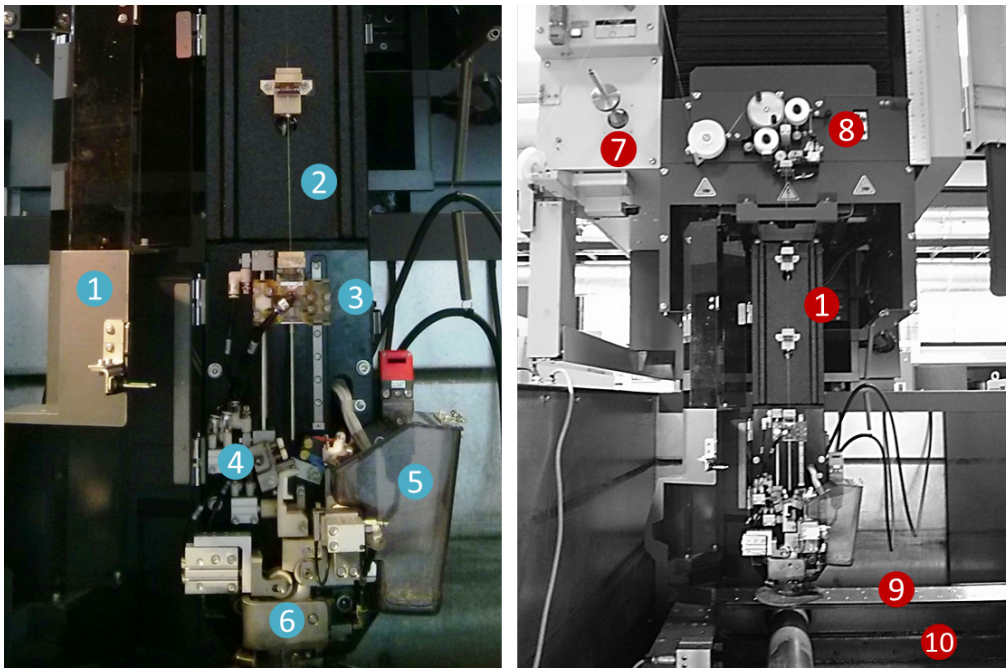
| 1. Guard | 2. Wire | 3. Tension control | 4. Wire cutter (spark) | 5. Wire collection | 6. Lower tension control | 7. Wire spool | 8. Guide rollers | 9. Machine bed | 10. Dielectric fluid tank |
